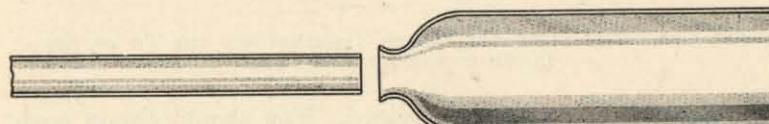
TUBE SHOWN SLIGHTLY FLARED TO ENGAGE SMALLER ONE
